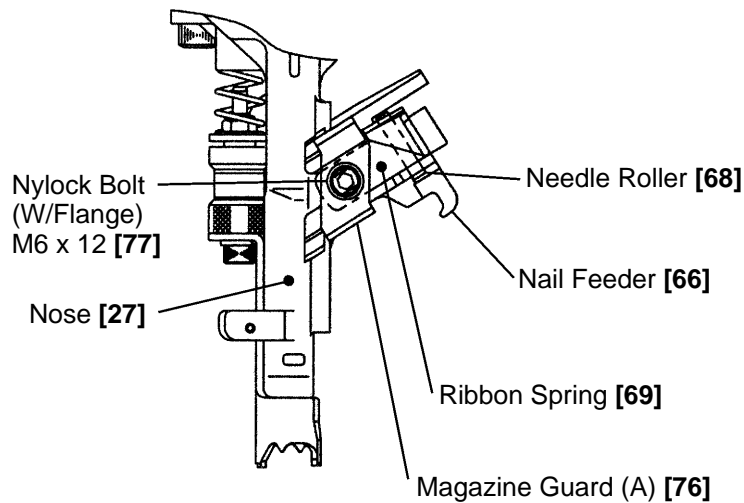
Mounting of the Nail Feeder and Ribbon Spring
